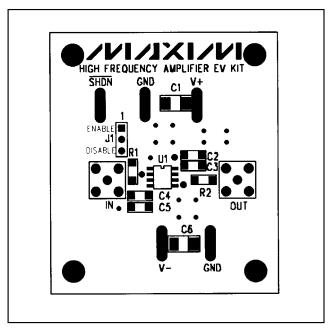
MAX477 EV Kit Component Placement Guide—Component Side
